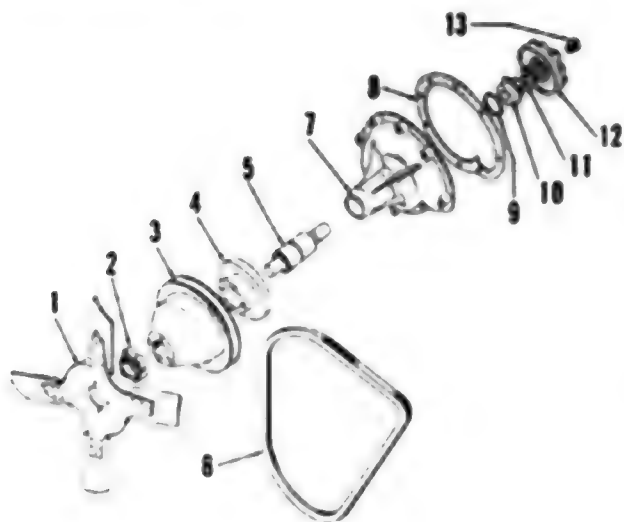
Exploded view of typical water pump assembly used on all models.
